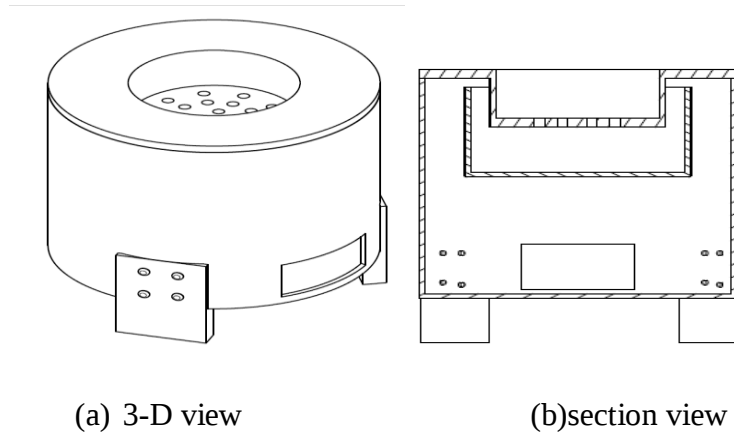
New Improved Stove (a) 3-D view (b) section view
